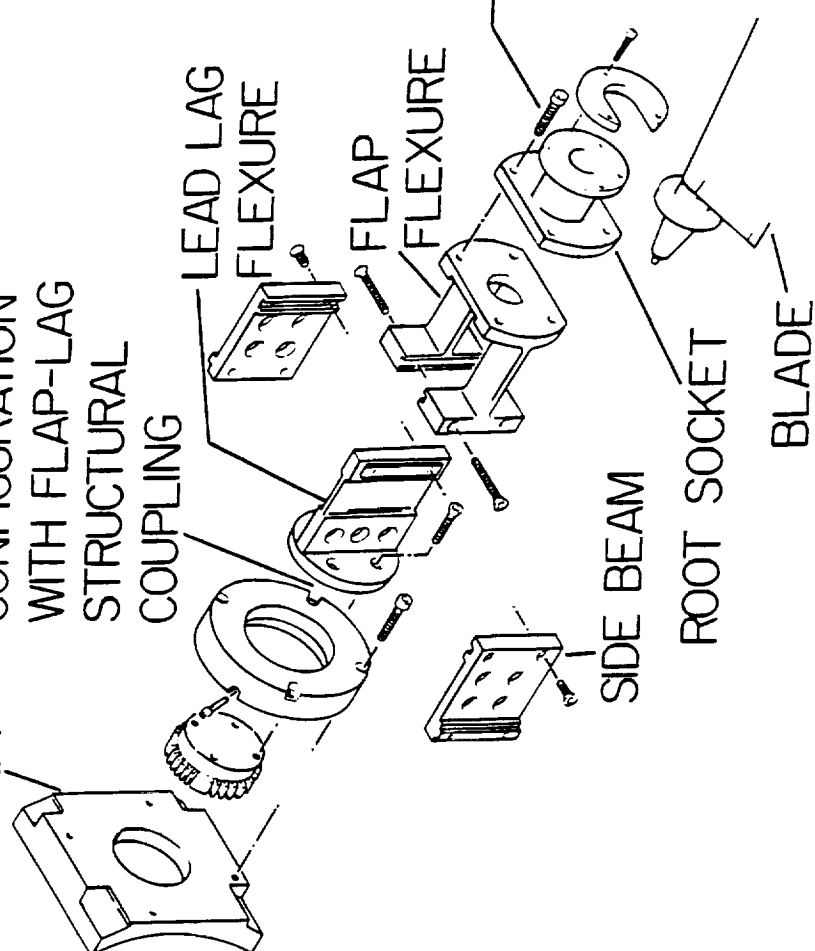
Exploded View of Root-Flexure-Blade Assembly
